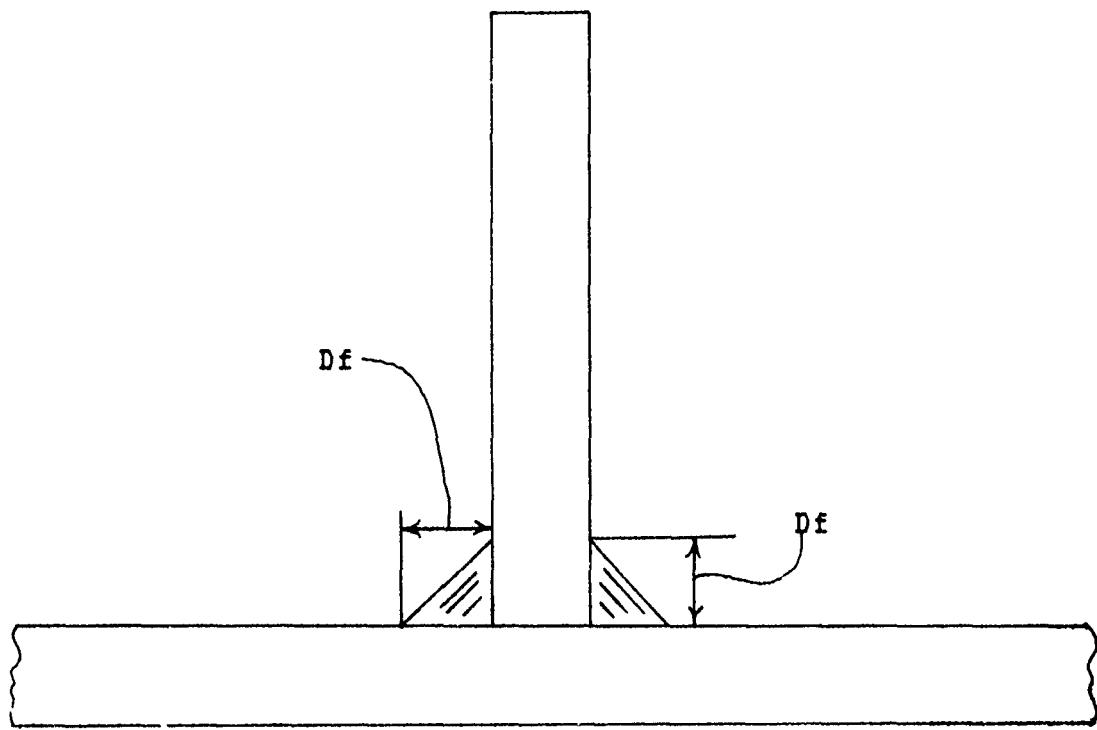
DEFINITION OF WELD SIZE ( $D_f$ )
